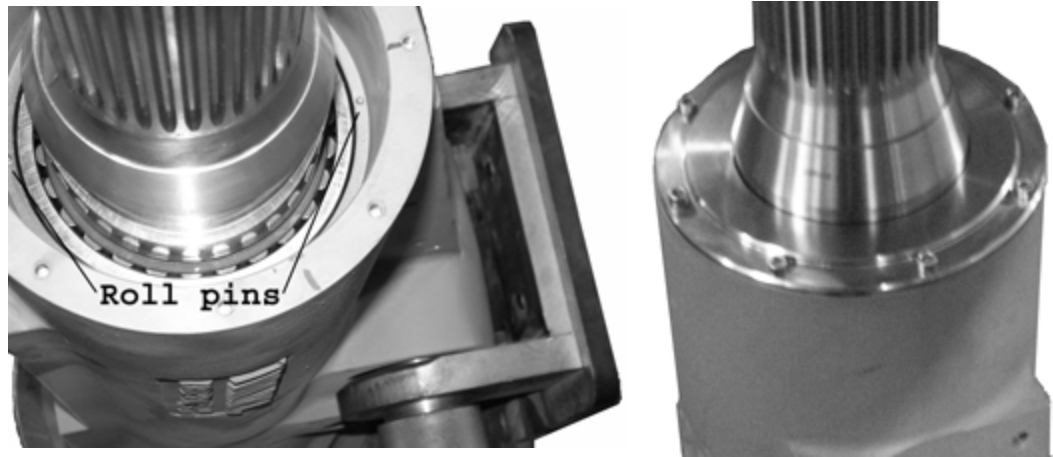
Match Notches in Seal Cover with Roll Pins (left), and Install Seal Carrier (right)
